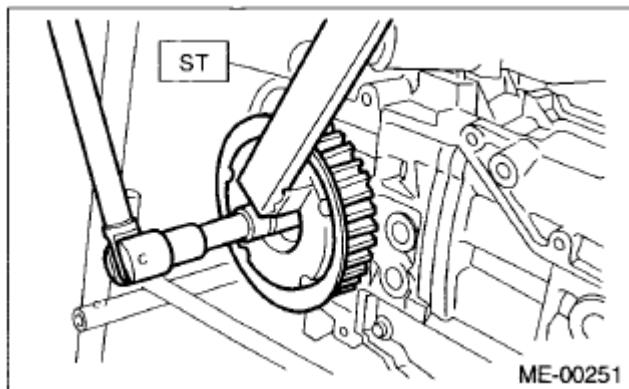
Tightening Cam Sprocket Bolt Using ST
